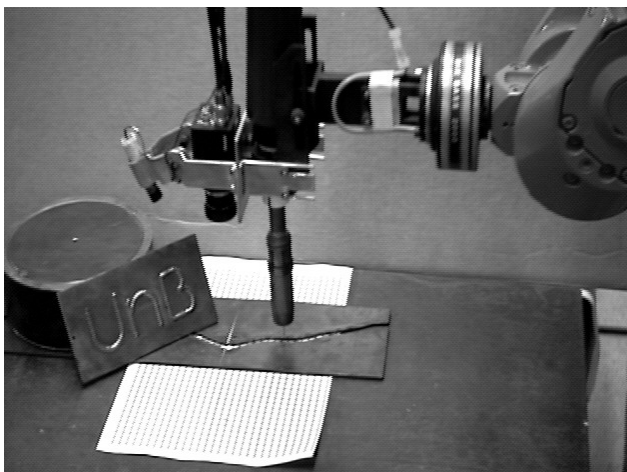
CCD-guided weld robot at GRACO, detail view.
